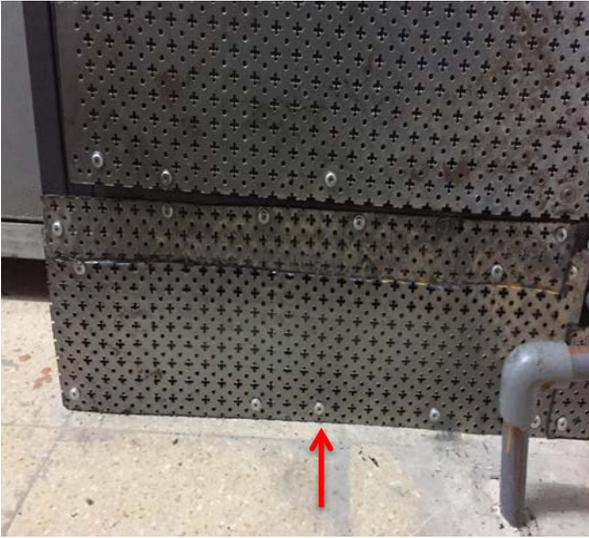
Plated cage screwed to the outside of the frame for easy access.
